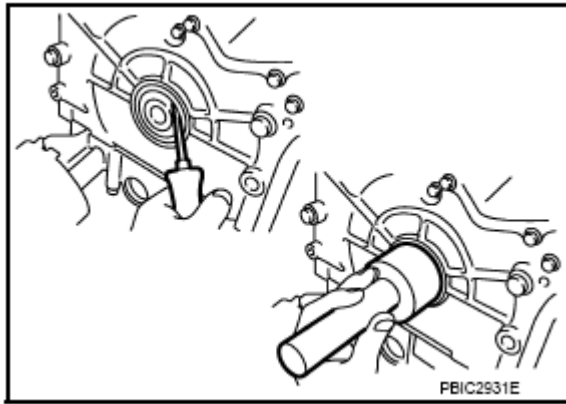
Removing Front Oil Seal Using Suitable Tool
